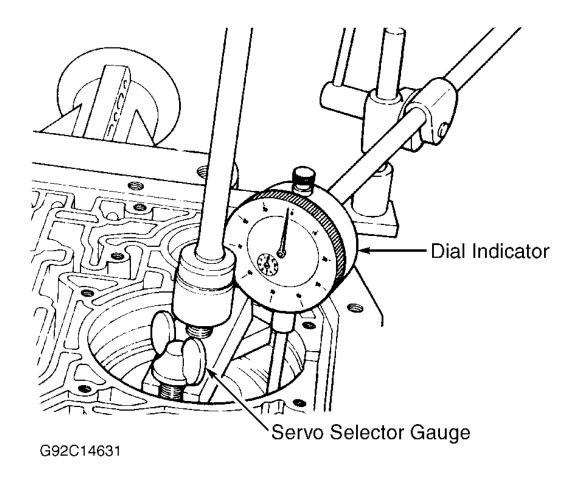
Measuring Reverse Servo Pin Travel Courtesy of FORD MOTOR CO.
